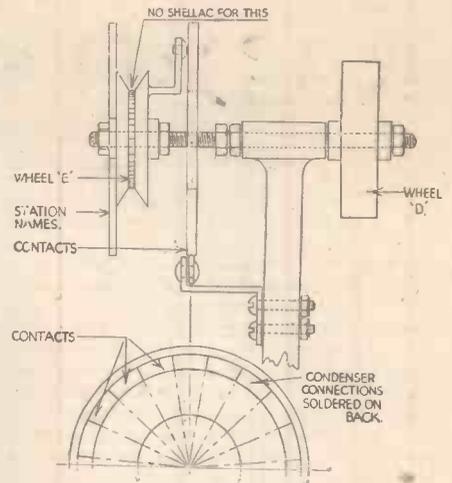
Illustrating a method of using the switch for push-button tuning.
